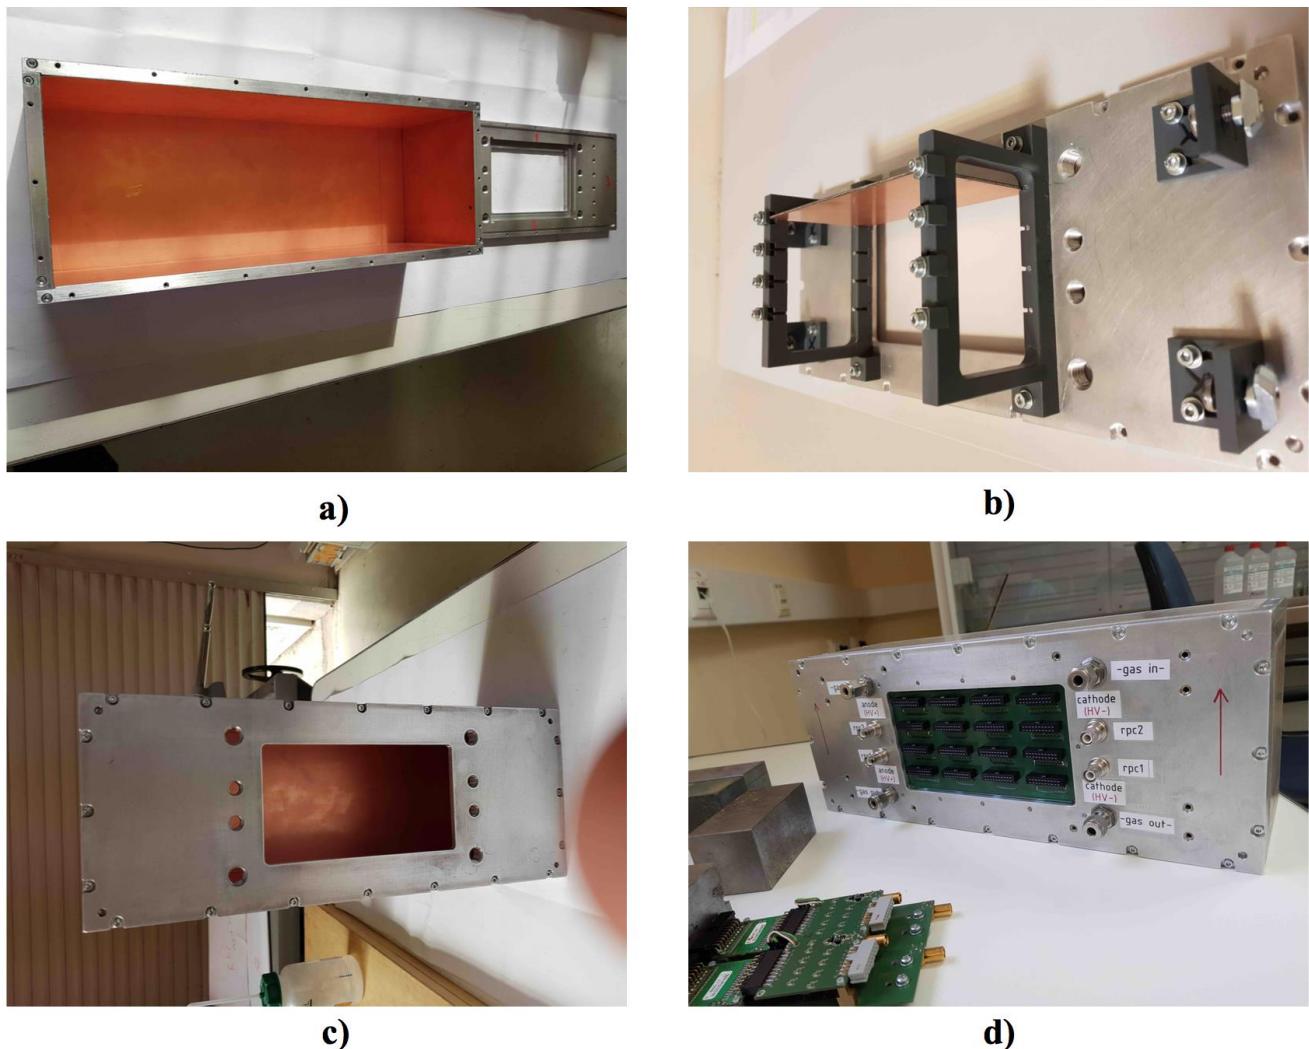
Prototypes of: a) housing box; b) back flange with FEE mechanical supports; c) housing box mounted on the back flange; d) RPC mounted in the housing box with the signal transmission PCB and HV, gas feed through on the back flange.
